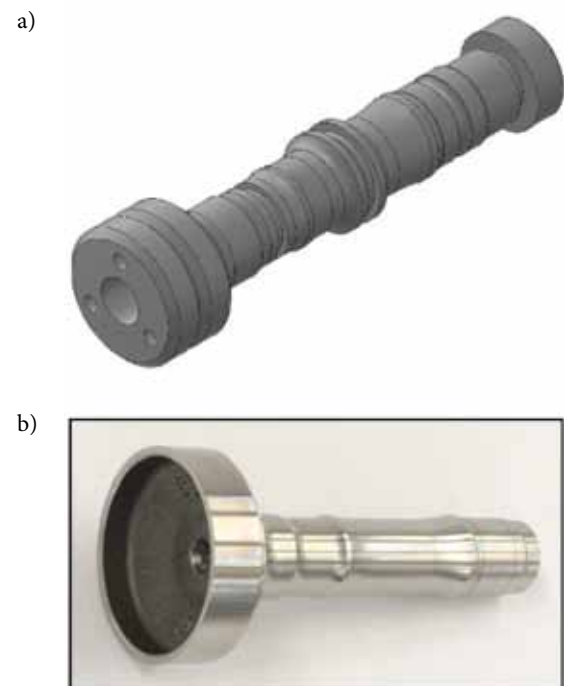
The scope of measurement possibilities of the developed method in relation to the prototype of the optomechatronic inspection system (a); sample element produced in an integrated production and quality inspection system subjected to inspection (b)
